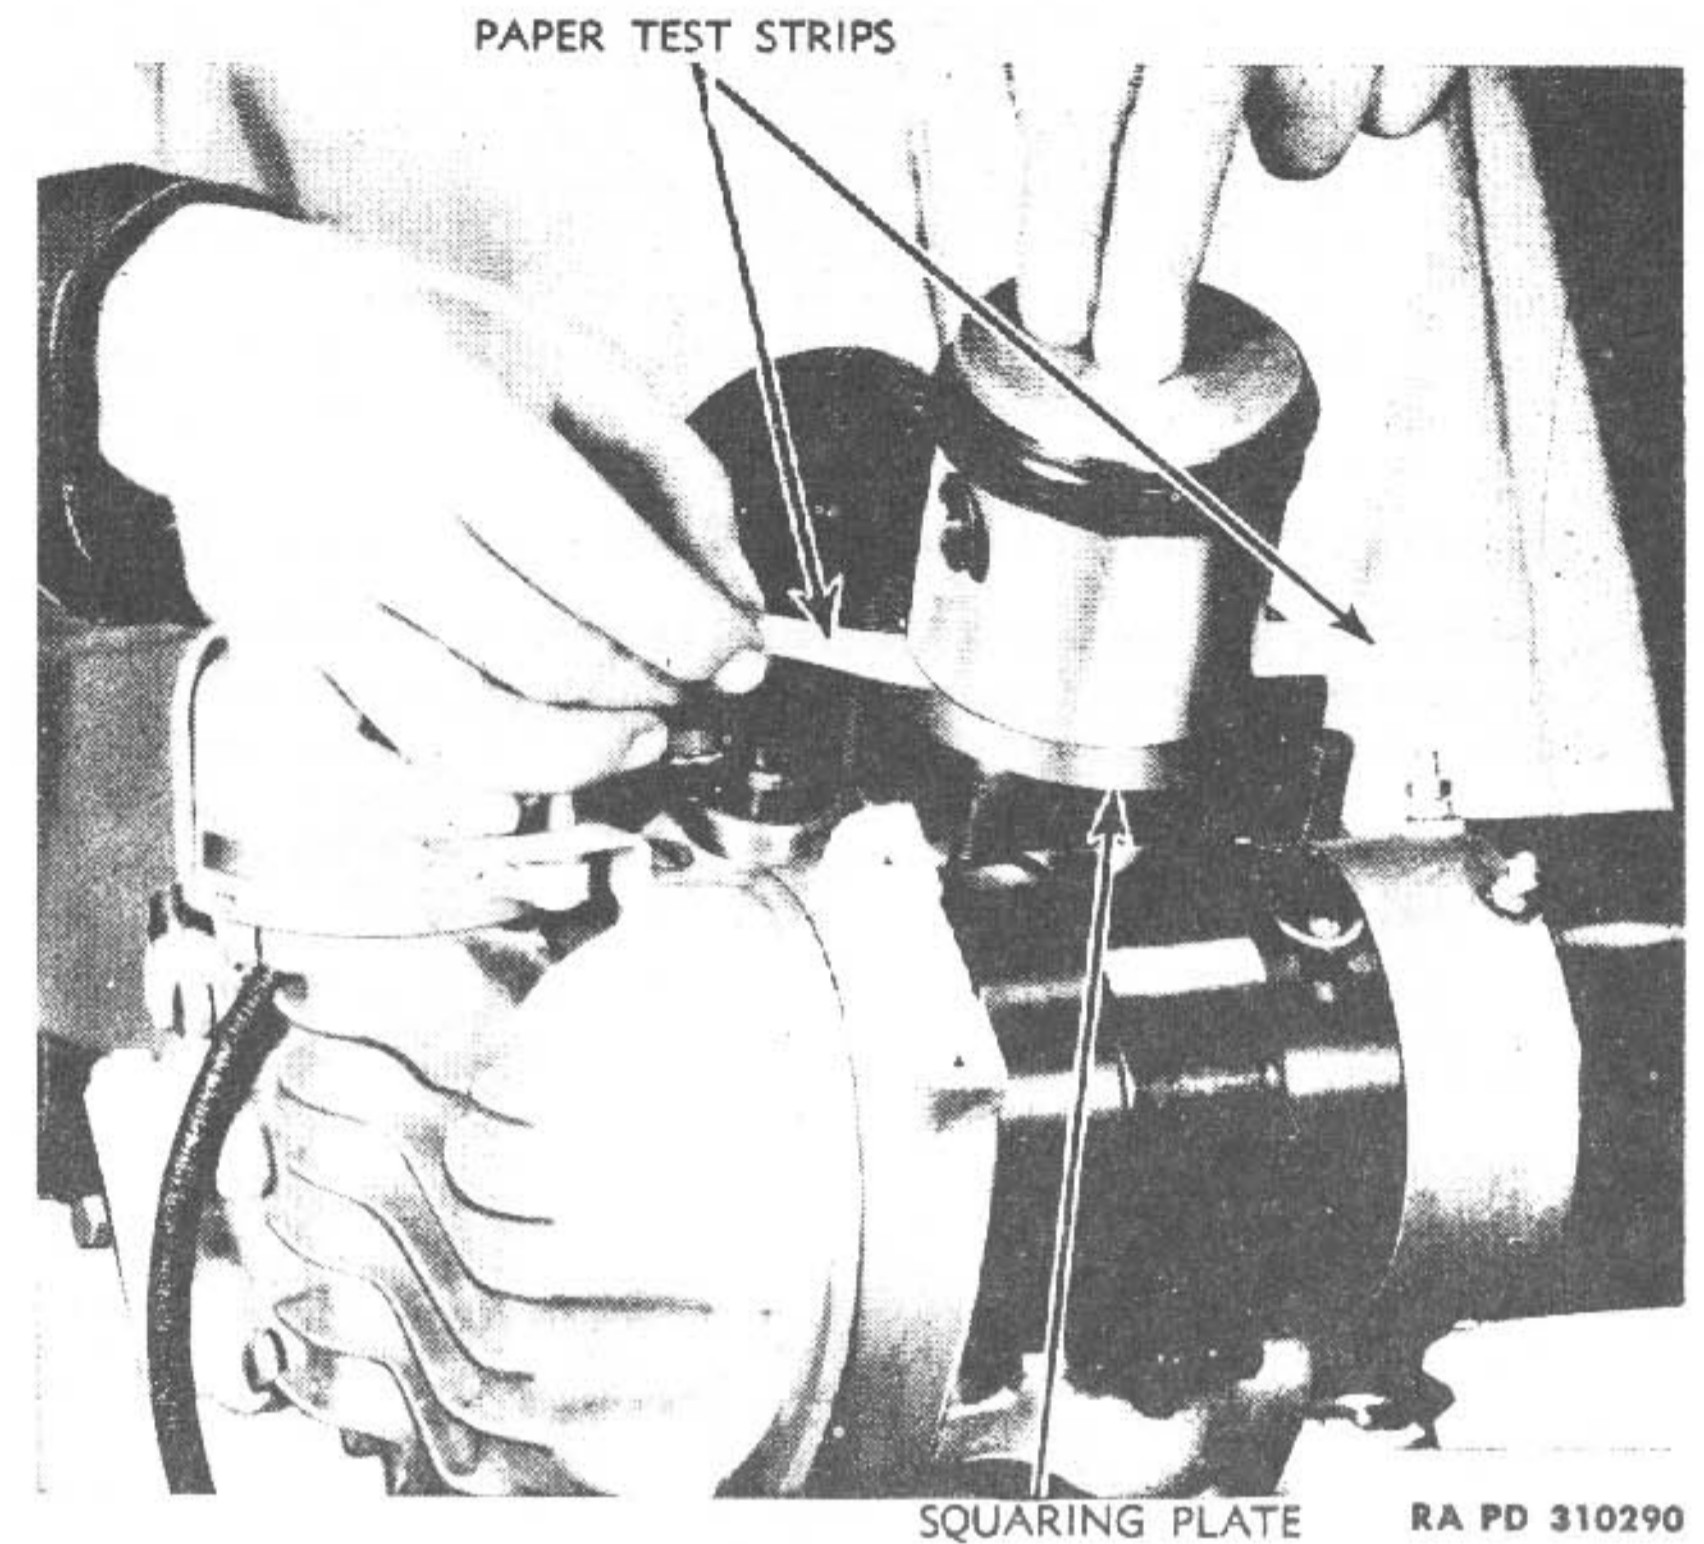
Checking Connecting Rod Alinement with Squaring Plate (41-P-1550-25)
